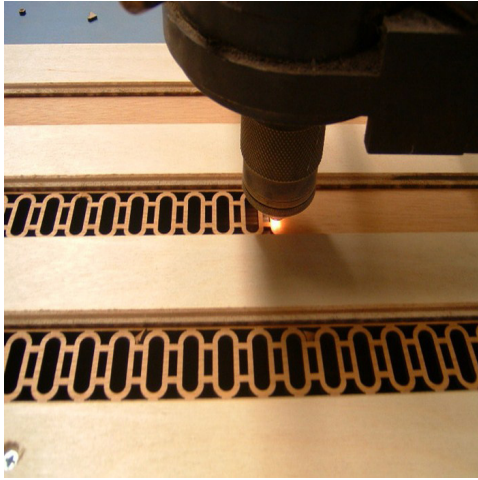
A laser cutting machine in operation. (Kingston University London, Unknown)
